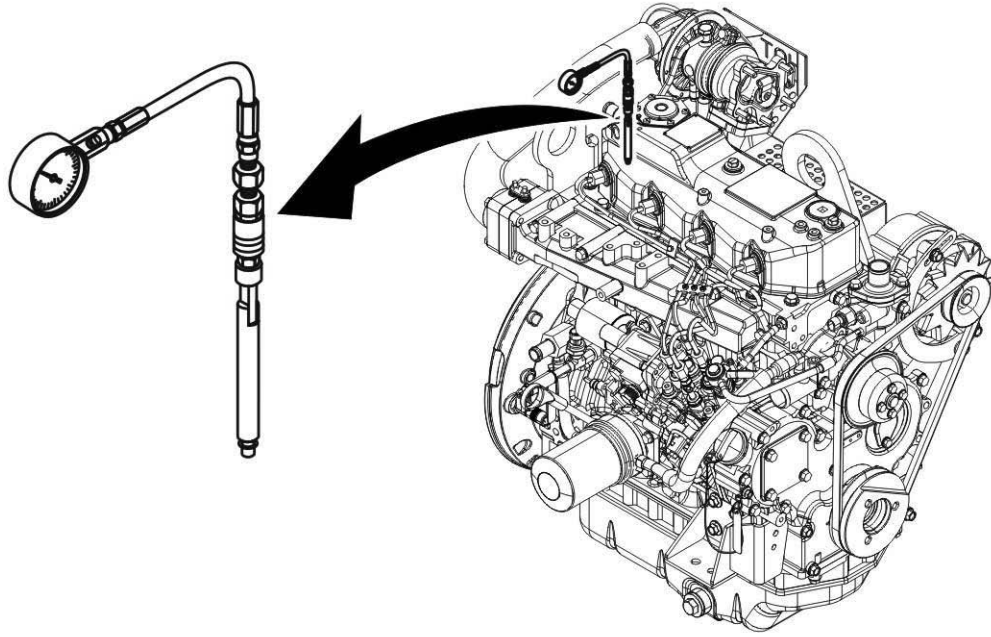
Compression Gage in Fuel Injector Opening — Location.
